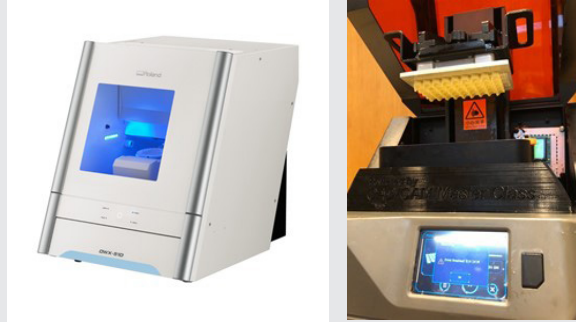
5-axis milling machine (DWX-51D, Roland) and 3D printer are capable of processing various materials.
